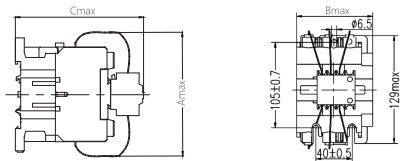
Outline and installation dimensions of CJ19-63~95 contactors
